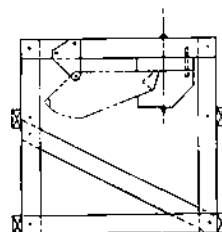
WING OUTER PANEL HOLDING JIG—SHEET 2 OF 2 SHEETS
